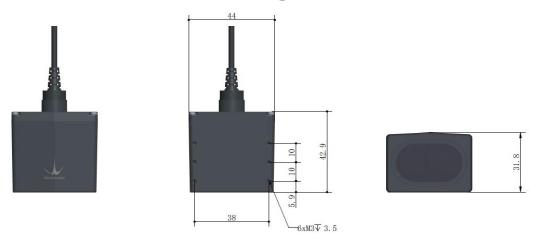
Dimensional drawing of TF03 (Left 1: top; Left 2: bottom; Left 3: front; Unit: mm)
